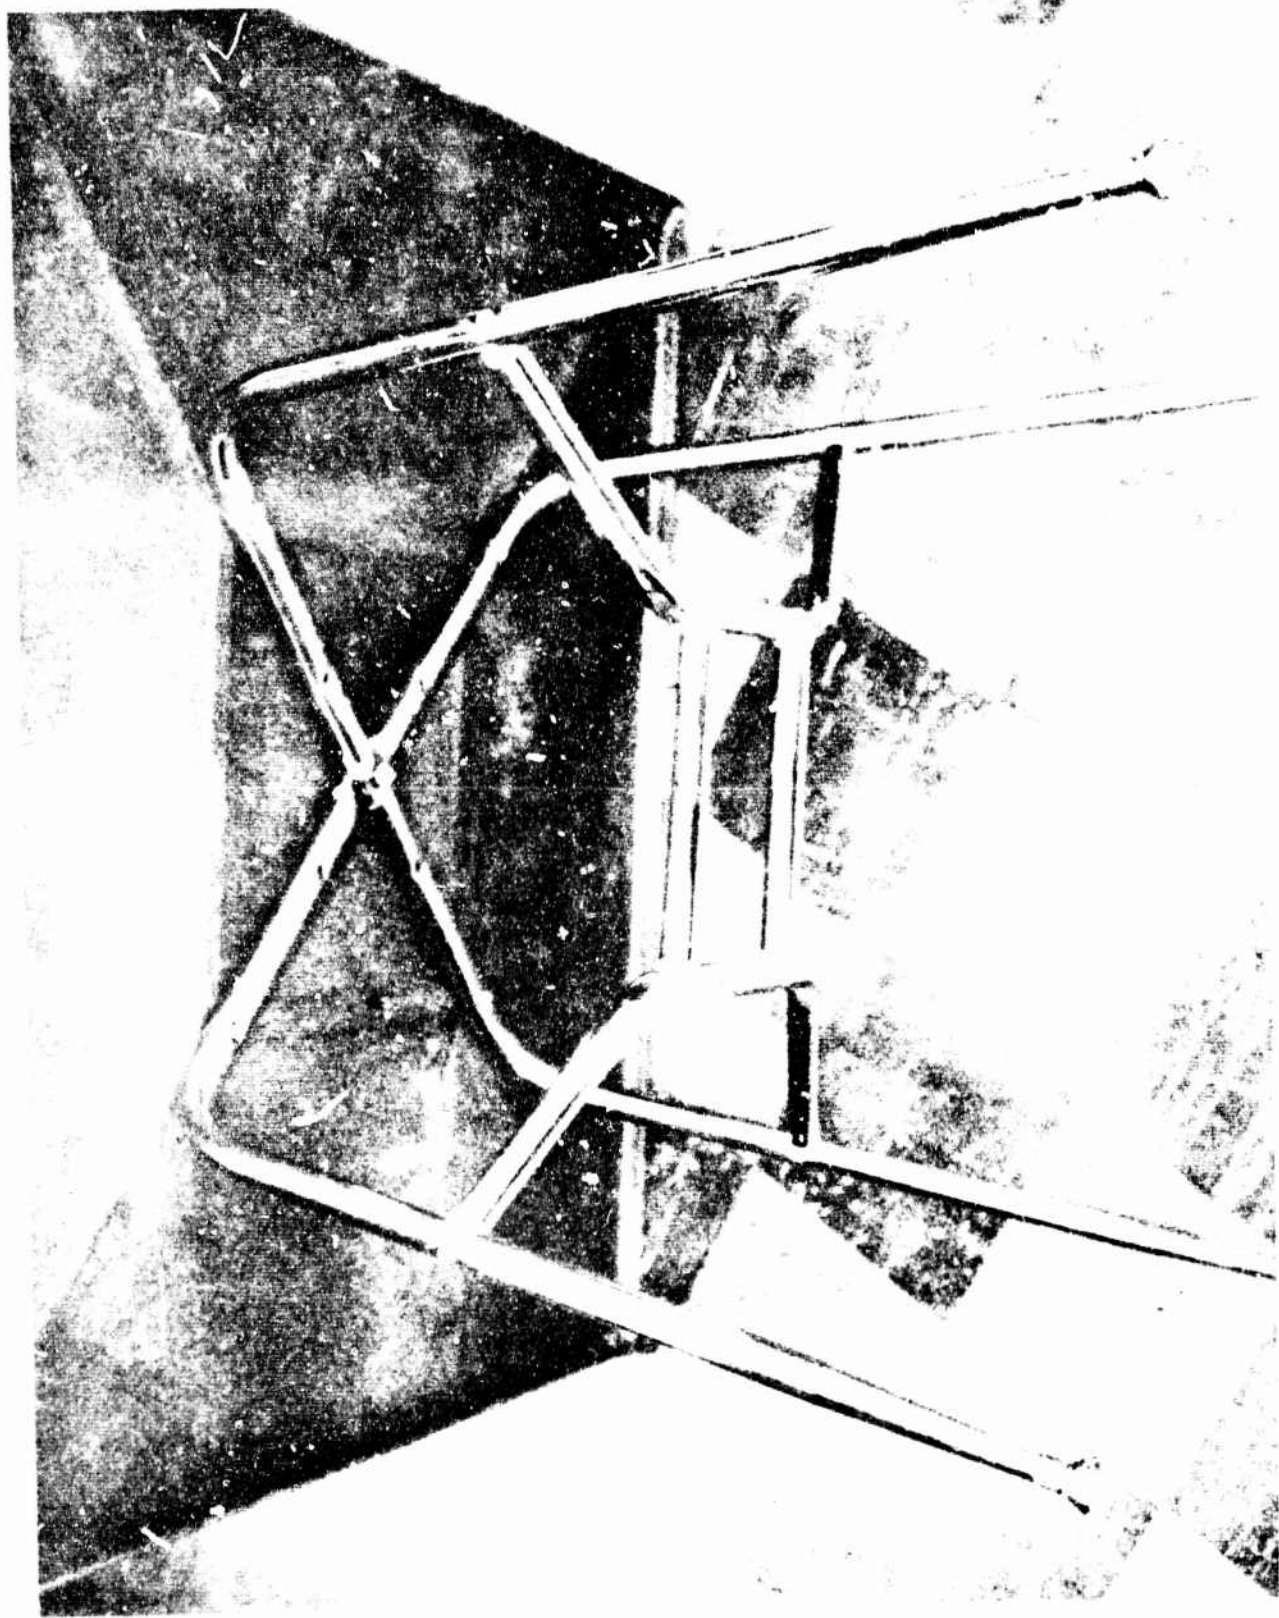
Hardware Assembly, Long Warner Four-legged Table.
